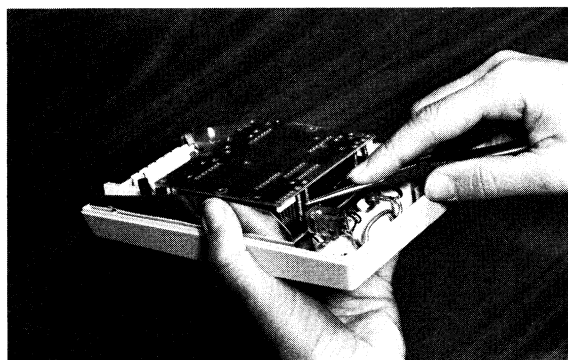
Removal/Replacement and Inspection Procedure — Electronics Assembly (continued)
